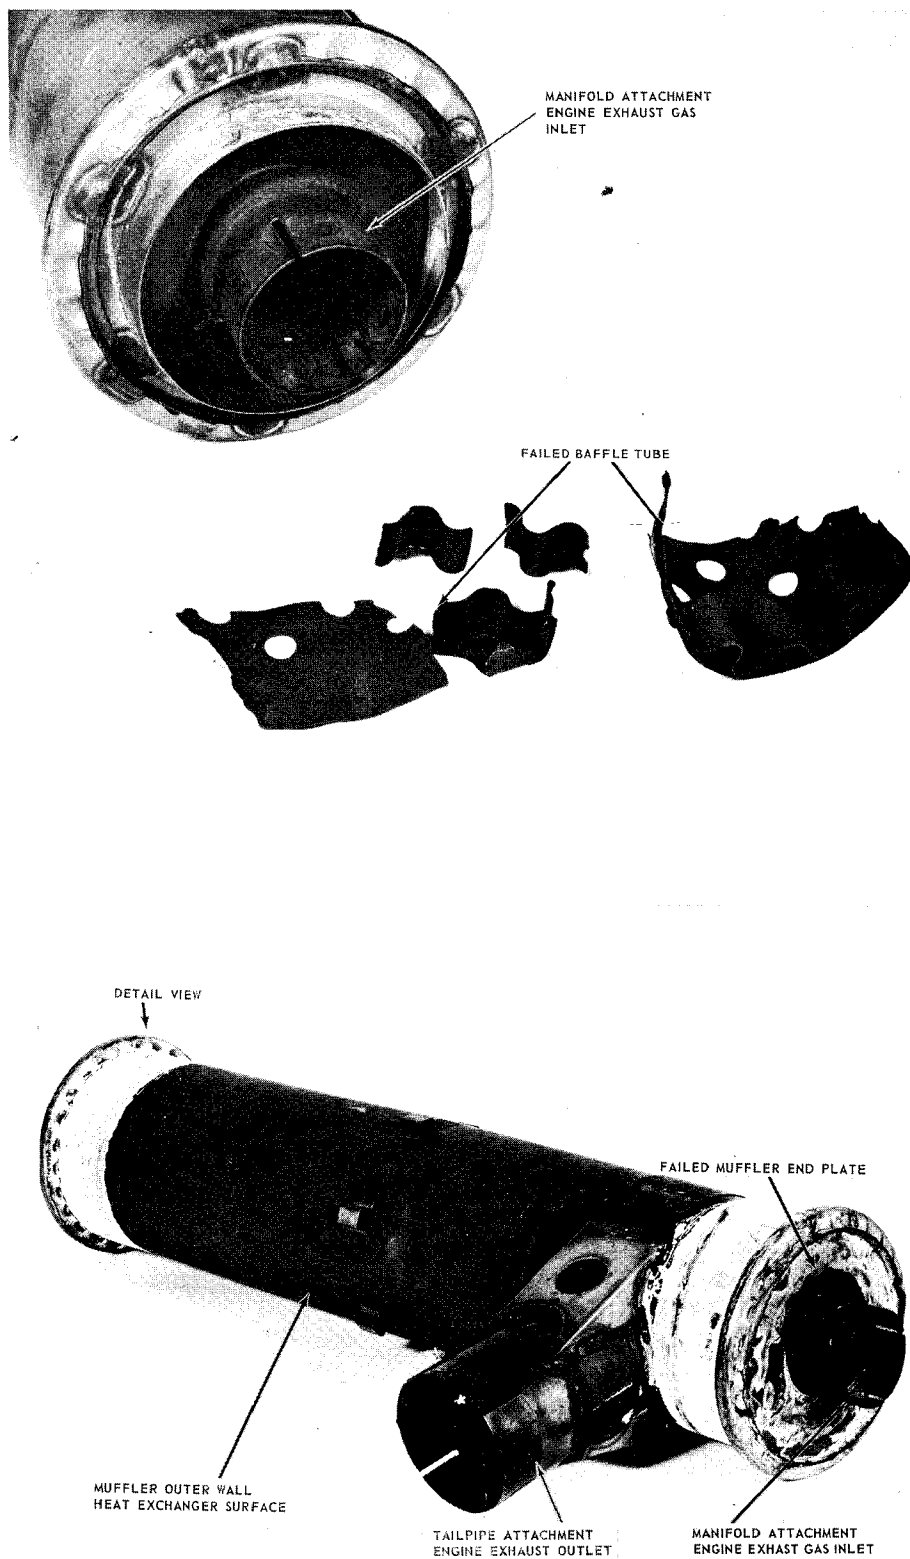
FAILED MUFFLER BAFFLE TUBE AND END PLATES
